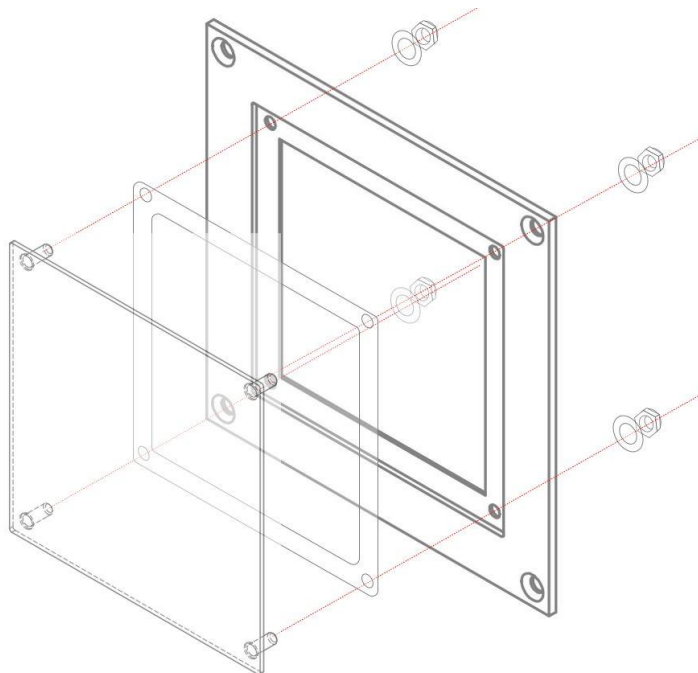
Assembling the device panel, dummy module, device panel gasket and front panel.
